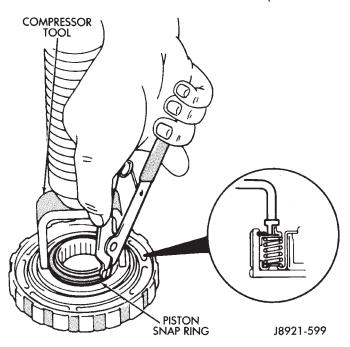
Removing/Installing Second Brake Piston Snap Ring
